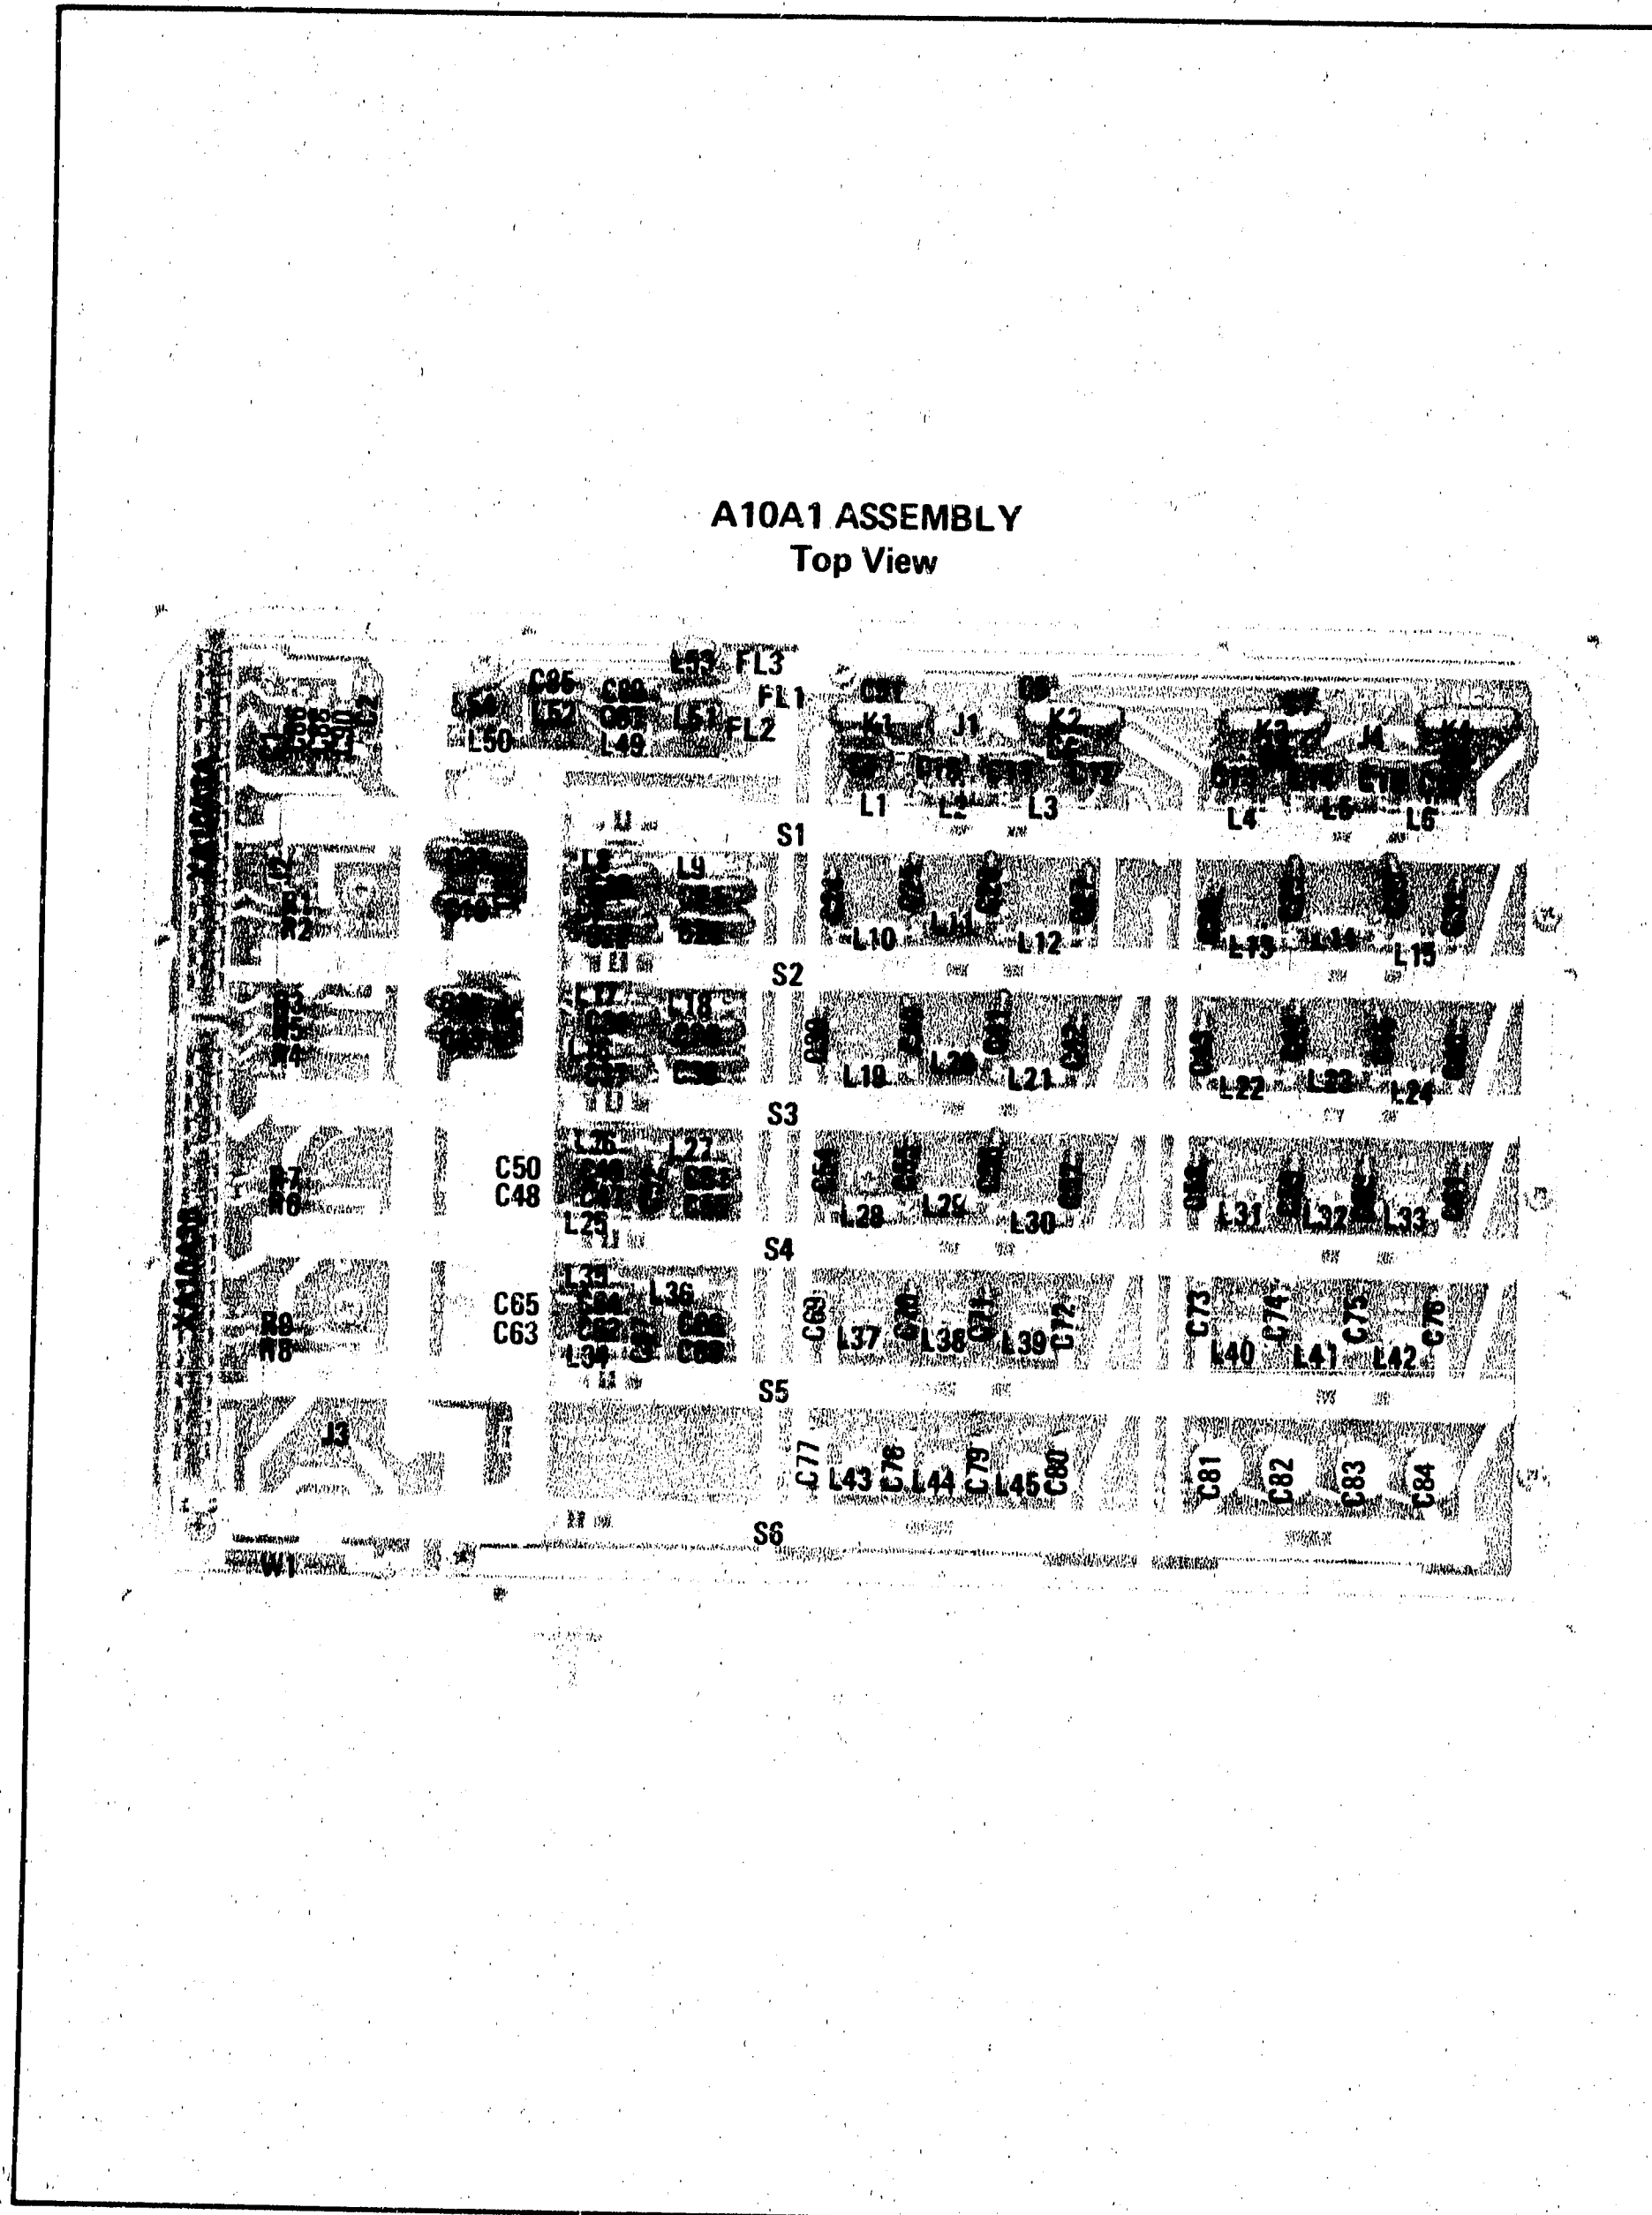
A10A1 RF Filter Assembly Component Locations (Top View)
